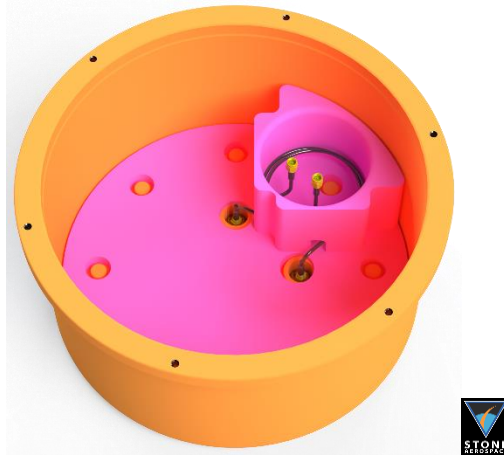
Top view of the Housing and Patch Antenna assembly, showcasing the SMA cables neatly coiled inside the insulation foam
